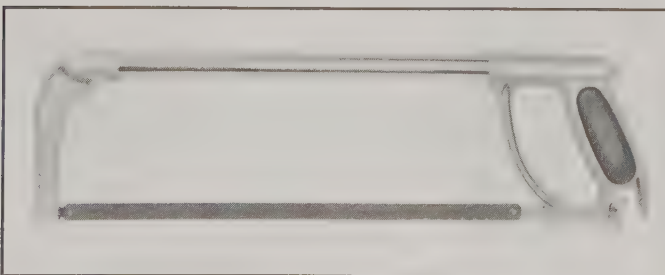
The hacksaw is an important tool for cutting metal. Blade teeth should face away from the handle, so that the saw cuts on the forward stroke. (Malco Products, Inc.)
